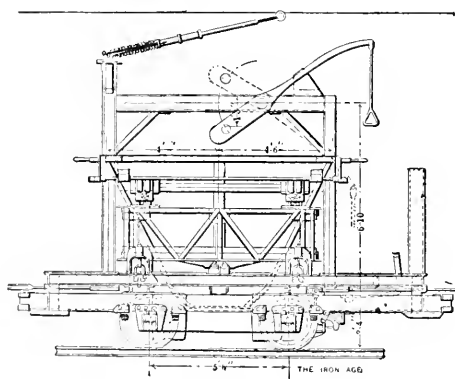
Side View of Transfer Car, Showing Lever for Opening Bin Chutes.
